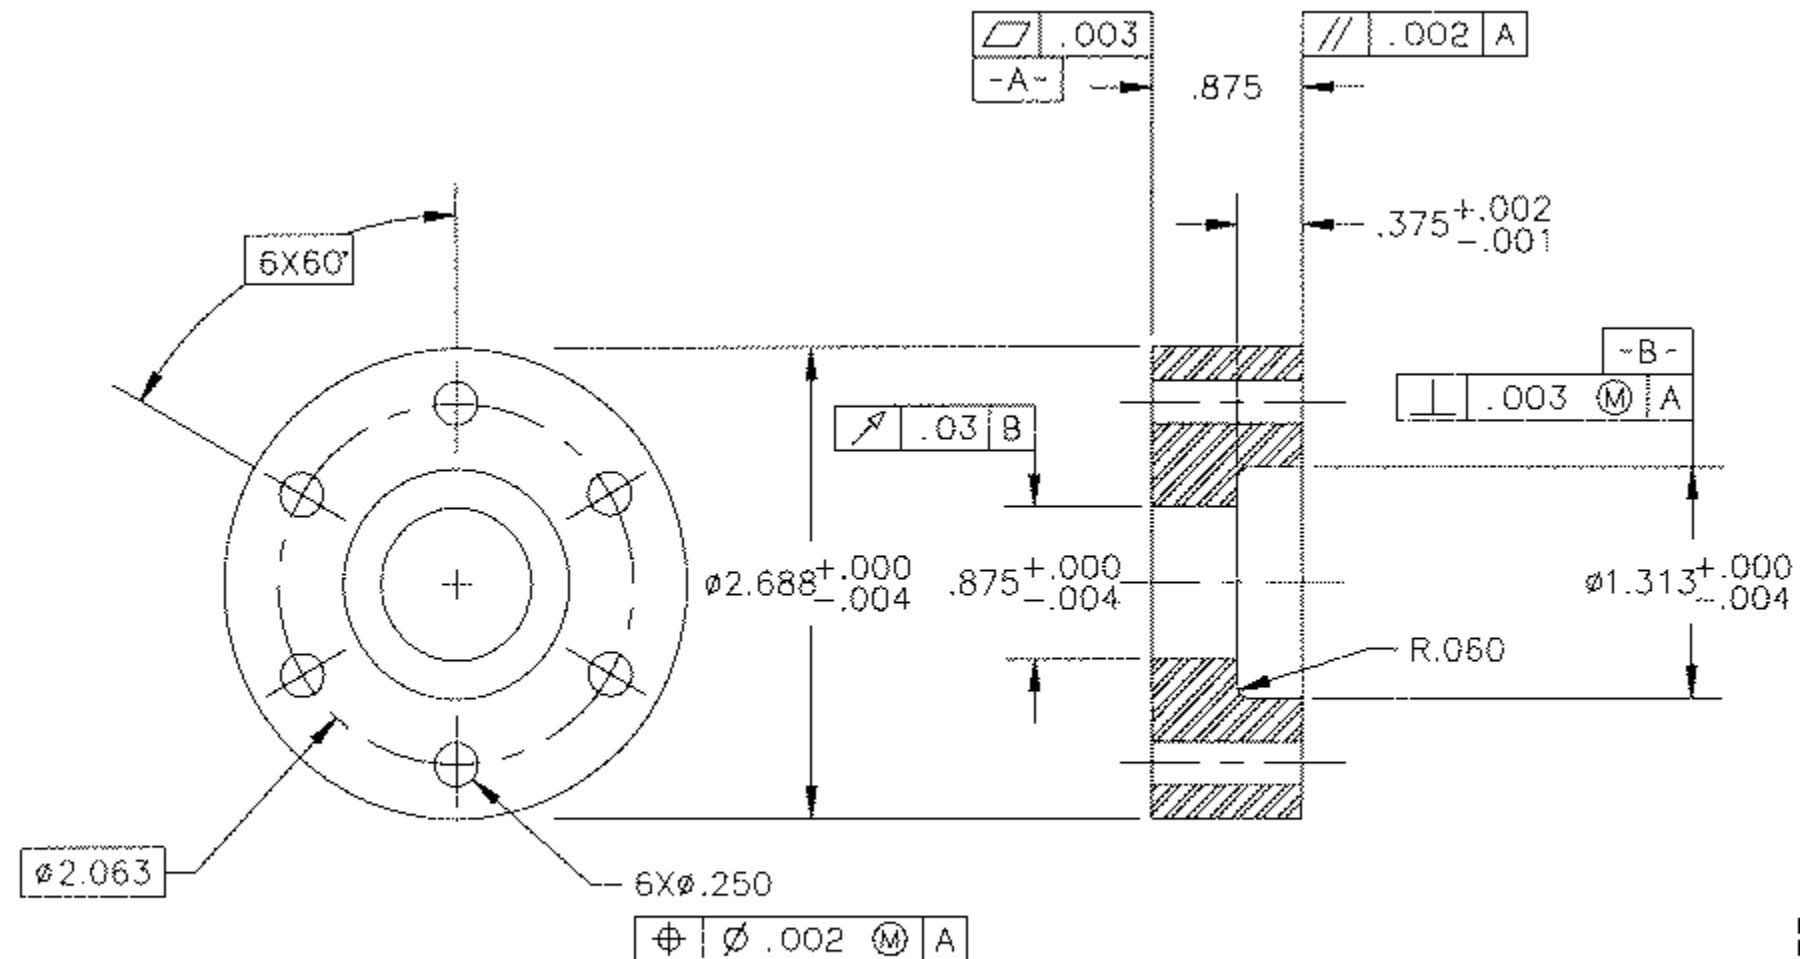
Typical Uses of Geometric Tolerancing
